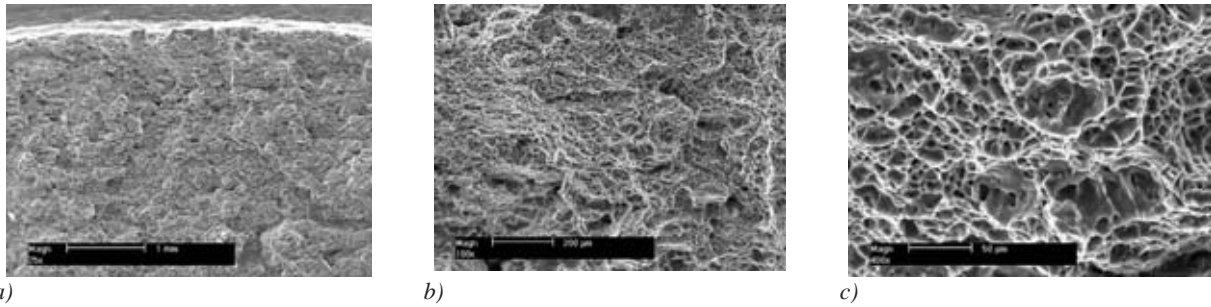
A view of a fracture after impact resistance test – specimen welded by MIG
